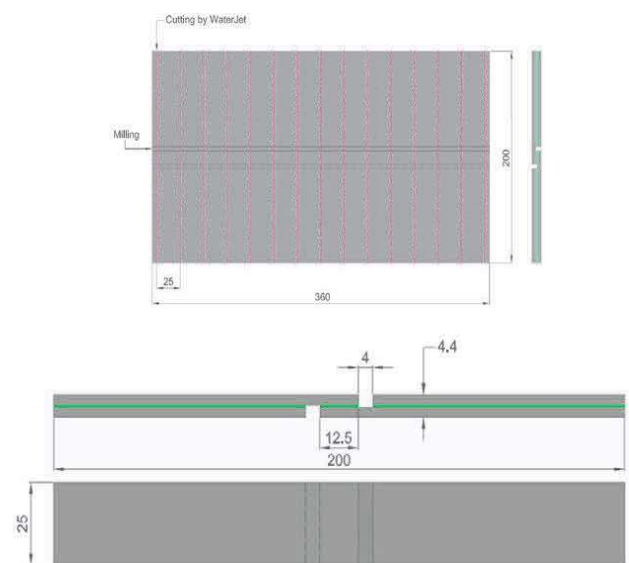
Dimensions of sample sheets with the cutting path for the shear test (a); geometry and dimensions of specimens for shear strength test (b)
